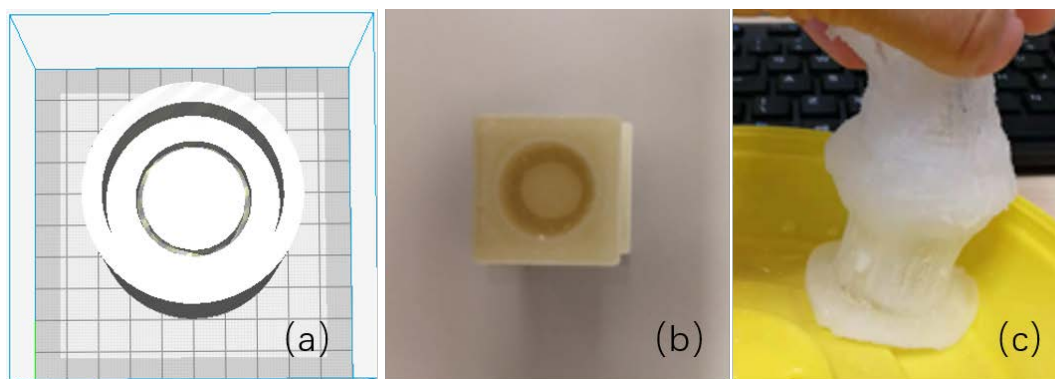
(a) 3D CAD model; (b) printed results of the initial valve-manufacturing trial using a hollow PVA mould; (c) silicone valve model after mould dissolving
